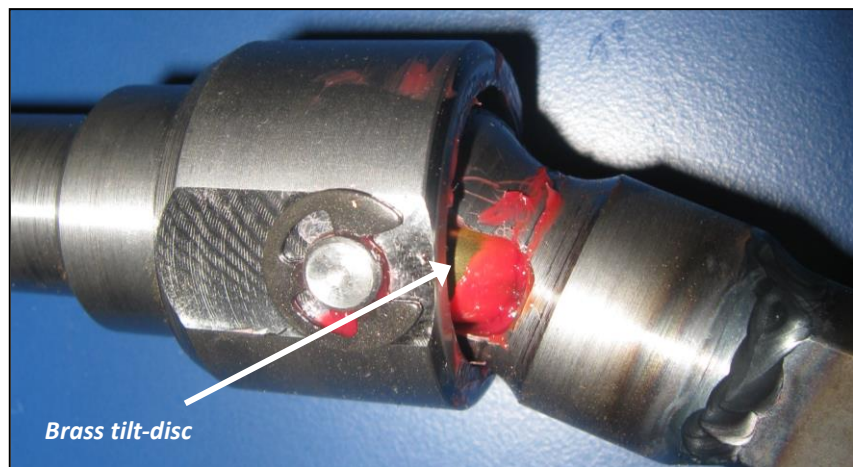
'Flaming River' brand swivel-joint tilt mechanism assembly.
